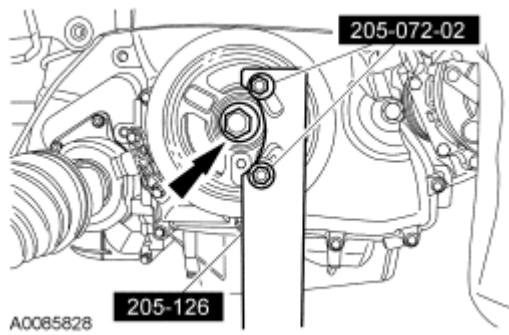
Using Special Tools (205-126 And 205-072-02)
